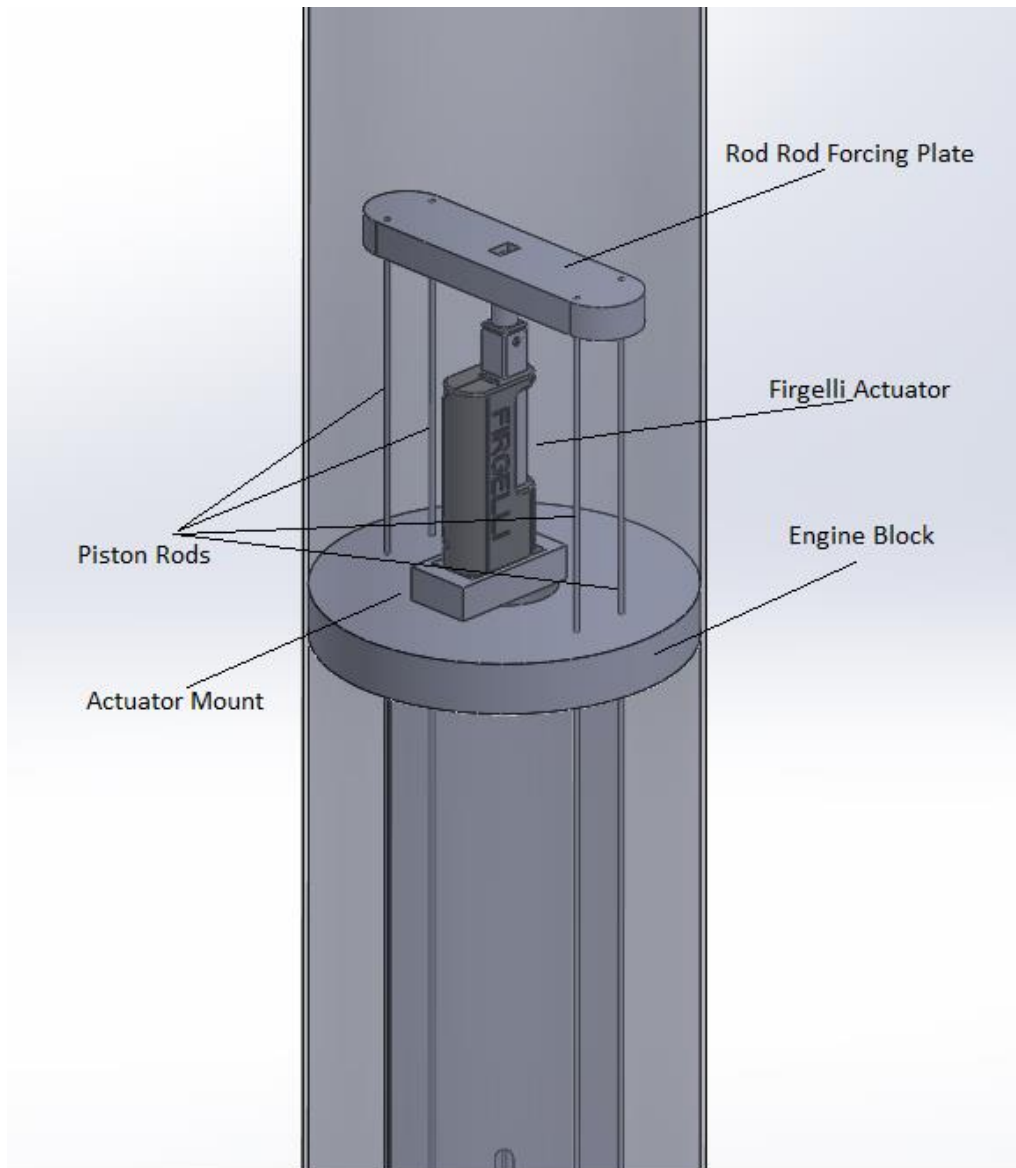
Placement and Mounting of Engine Block and Upper Actuating Components
